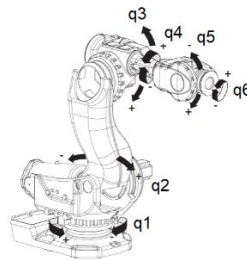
Robot Motion Axes IRB 7600 - manufacturer configuration [5]
